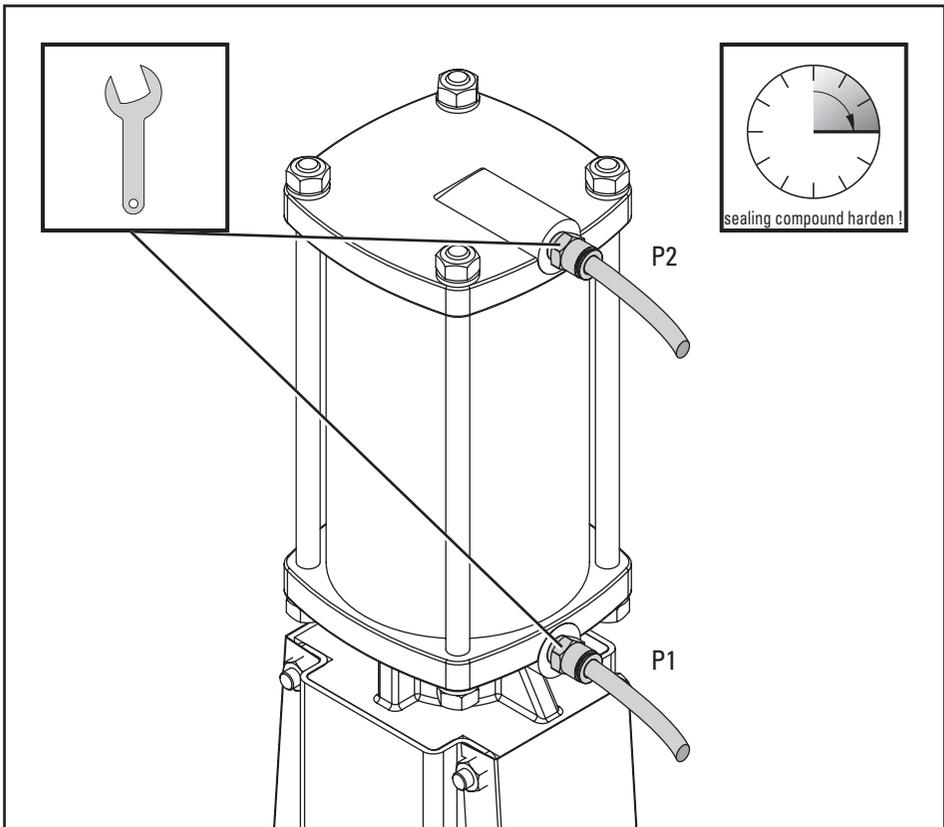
mounting / disassembly, pneumatic installation - function: double acting
